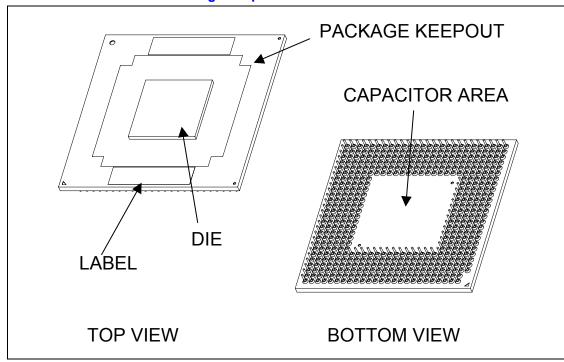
Socketable Micro-FCPGA Package - Top and Side View
